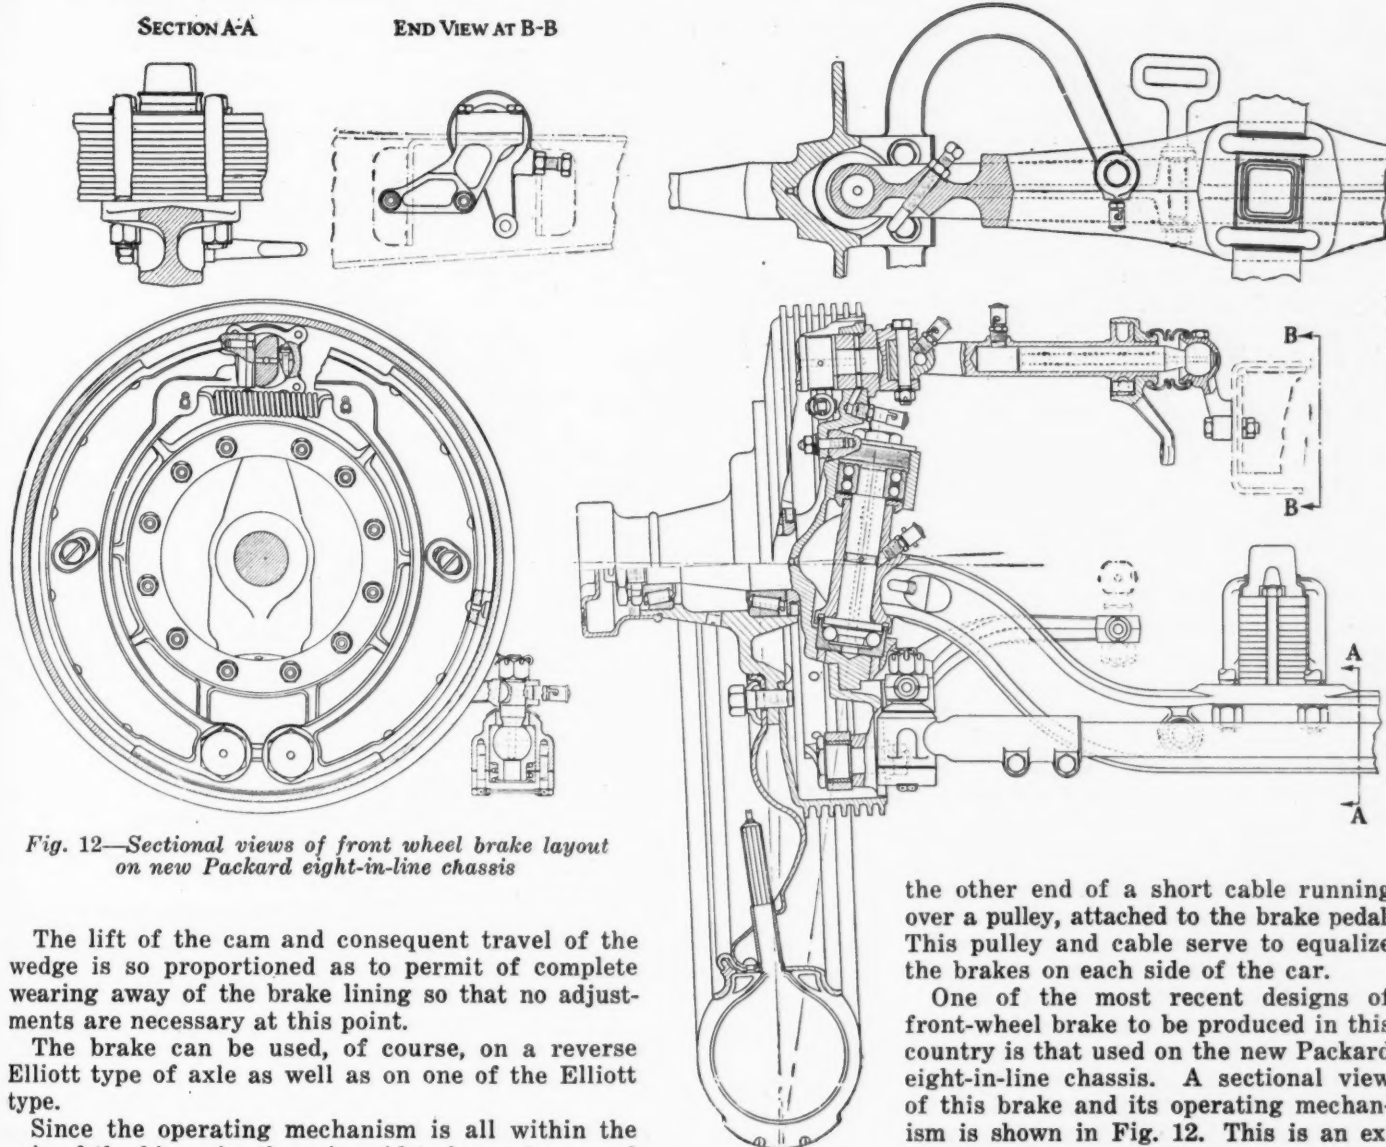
Sectional views of front wheel brake layout on new Packard eight-in-line chassis
